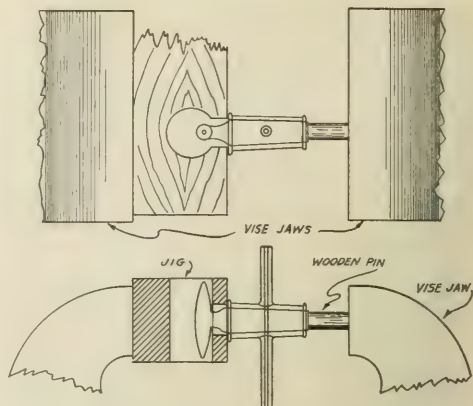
METHOD OF OPERATING STOPCOCK STEM REMOVER
